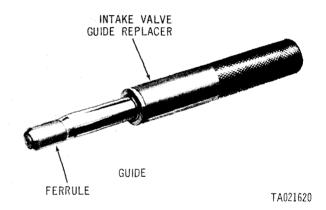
Positioning intake valve guide on valve guide replacer.
